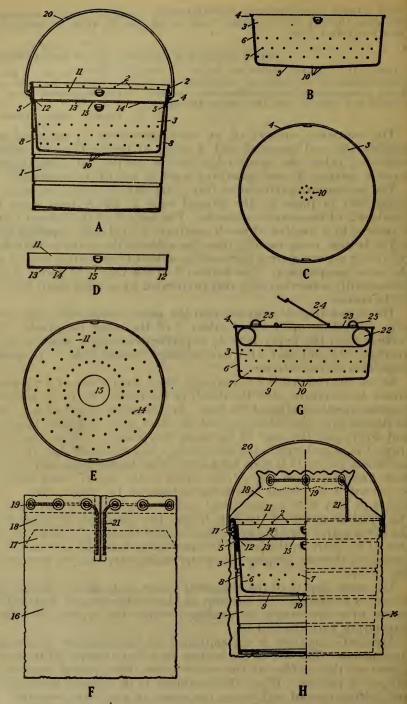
The Fearnow self-aerating fish transportation pail with canvas jacket. A, Vertical section of container; B, vertical section of lower tray; C, plan view of lower tray; D, vertical section of top tray; E, plan view of top tray; F, elevation of jacket; G, vertical section of a tray that may replace other trays in case container is used as a minnow or bait pail; H, side elevation, partly in section, of container with absorbent jacket in position.
